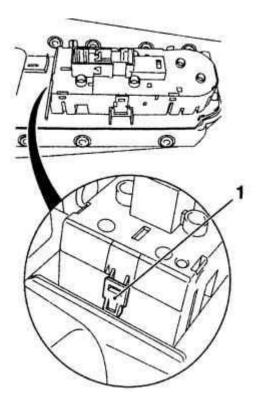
Latch main panel switches control electric windows: 1 - lock
